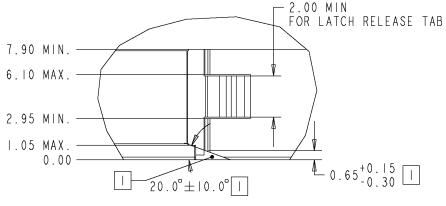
OSFP1600 module pc board (card-edge), neck area
